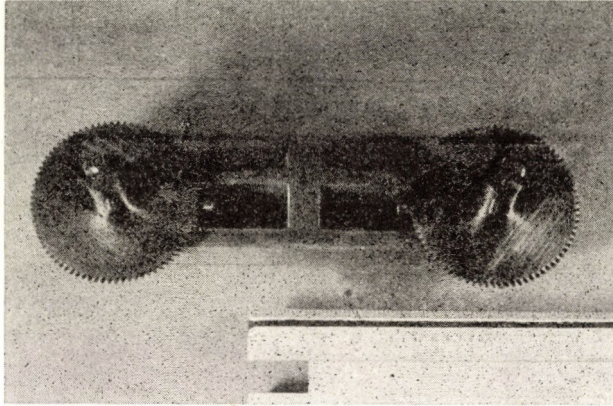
Bottom-view photograph of bending device (dimensions indicated by slide-rule scale)
